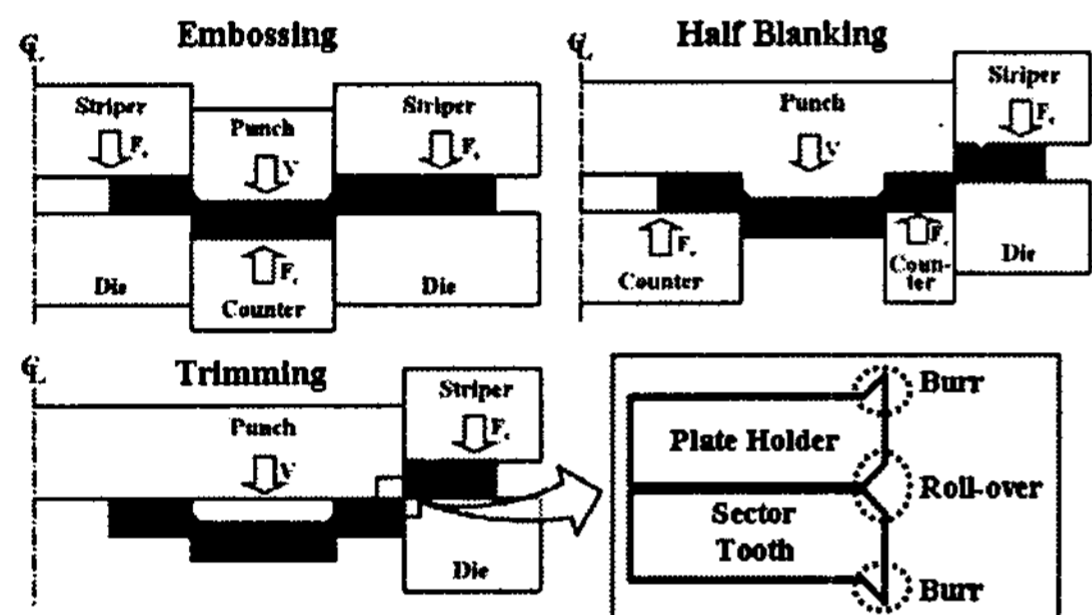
Schematic drawing of process layout and assembly of plate holder with sector tooth in previous FCF process
